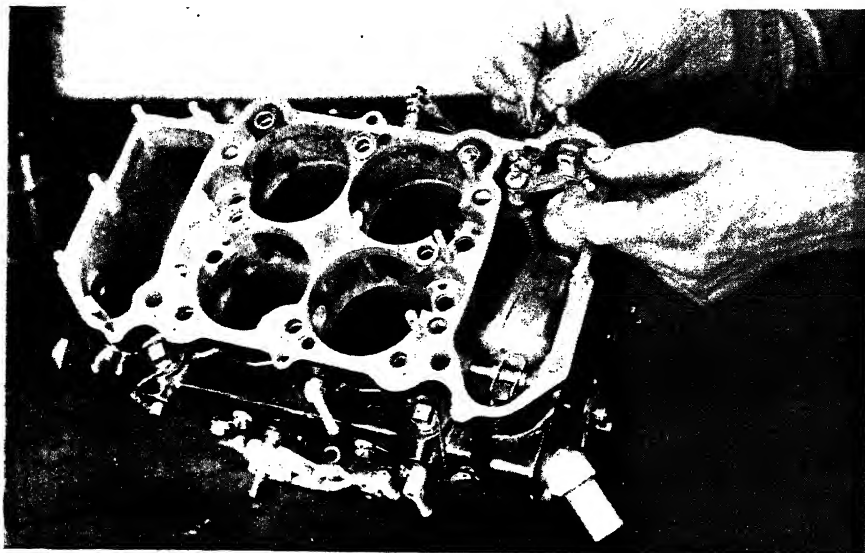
D.—SERVICING A STROMBERG CARBURETTOR (4)
